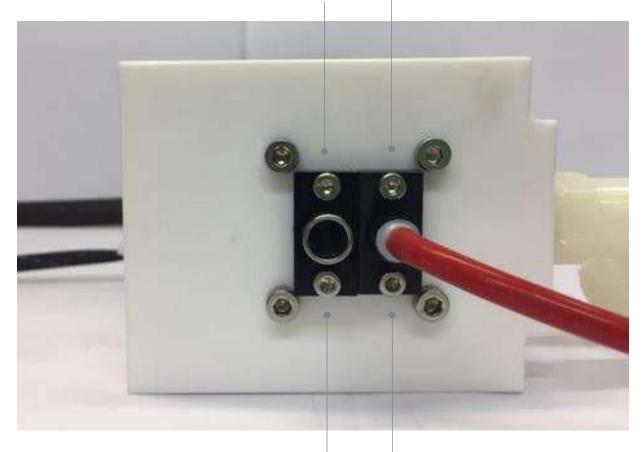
(End Cap Screws [Tightened on Both Ends of the Pump Chamber])
